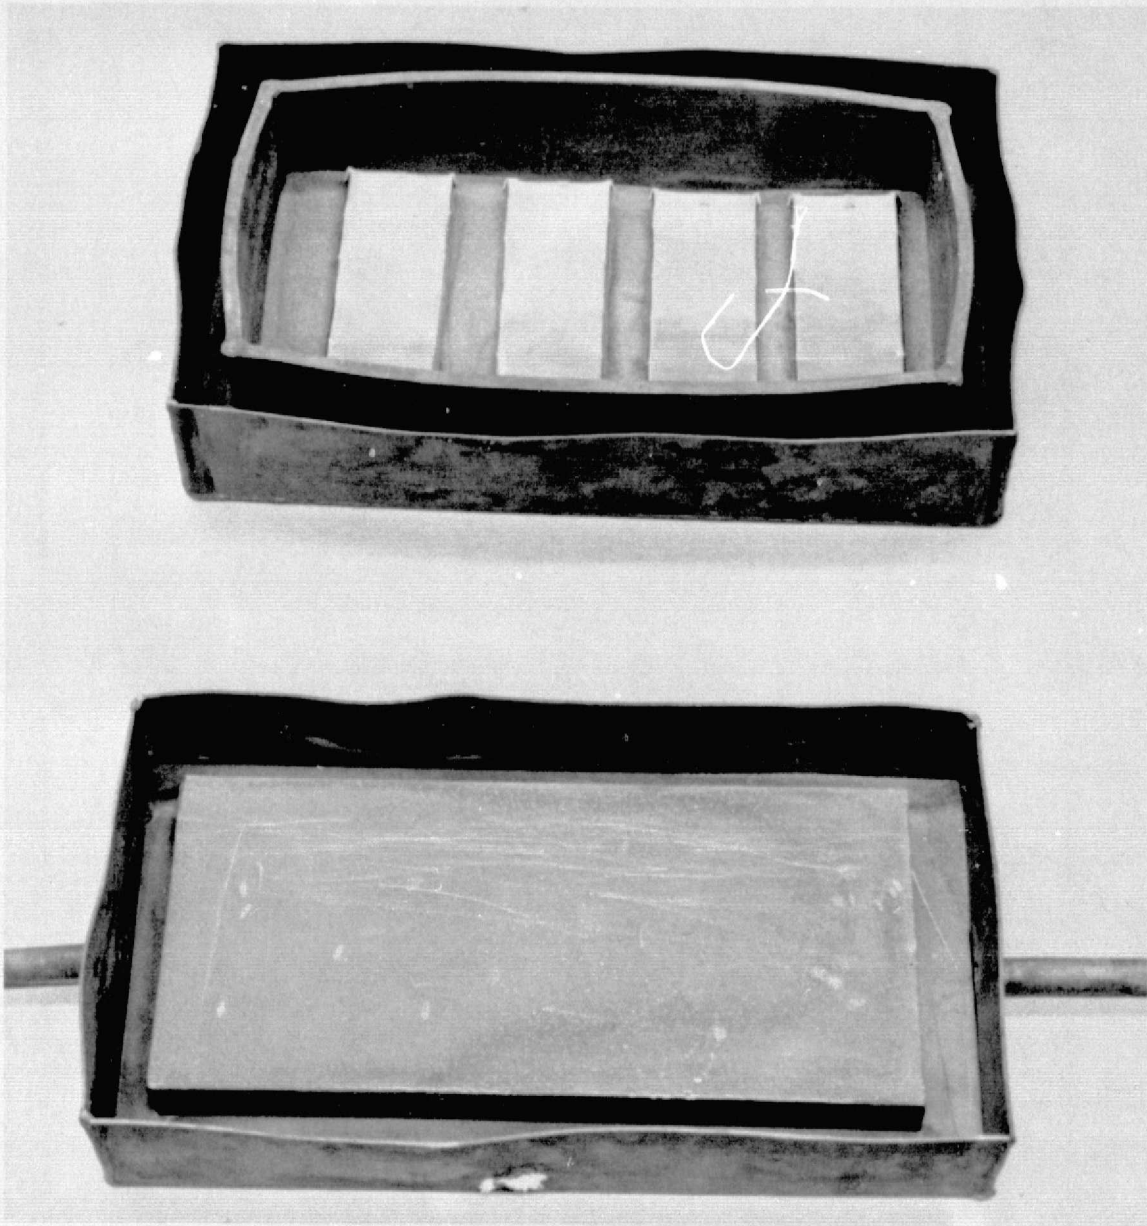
Disassembled Four Segment Argon Press Box with Shroud Segments in Place
